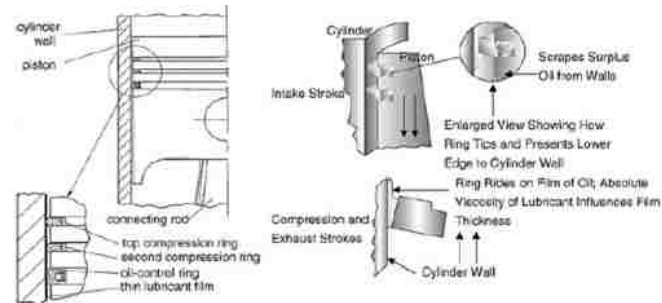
Piston assembly and piston ring function from an internal combustion engine [37]
